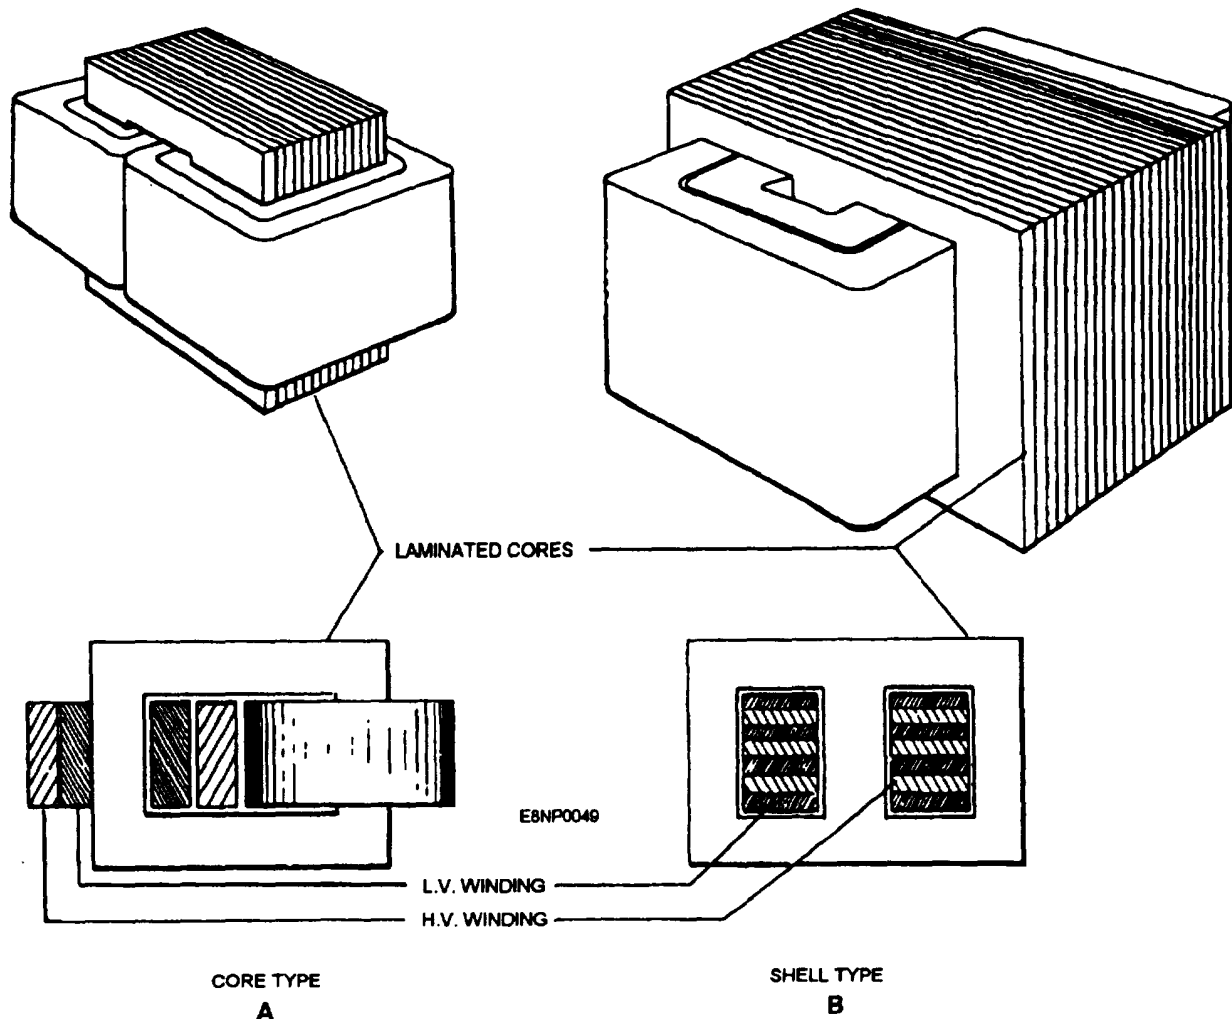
Types of transformer construction: A. Core type; B. Shell type.
